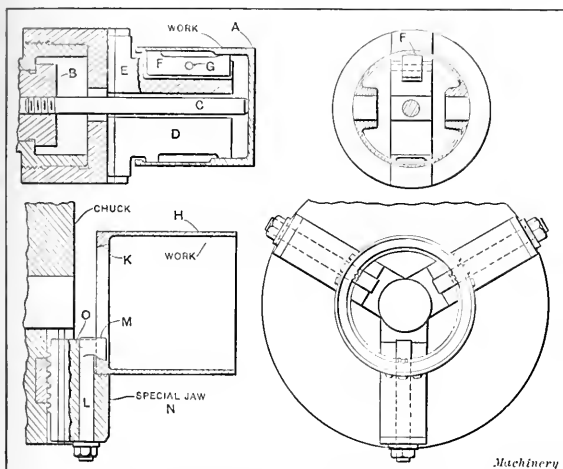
(Upper View) Two-jawed Chuck for holding Piston internally; (Lower View) Chucking Fixture for Piston Ring Pot
